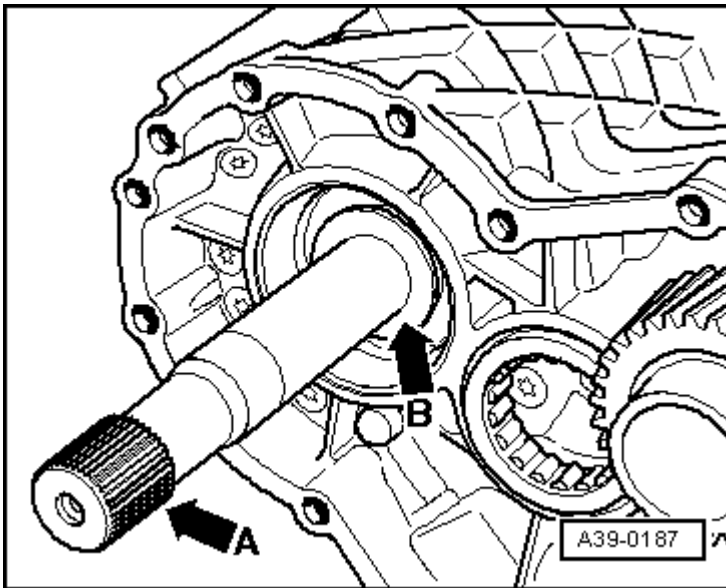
Cover Splines On Input Shaft (To Prevent Damage To Gasket)
